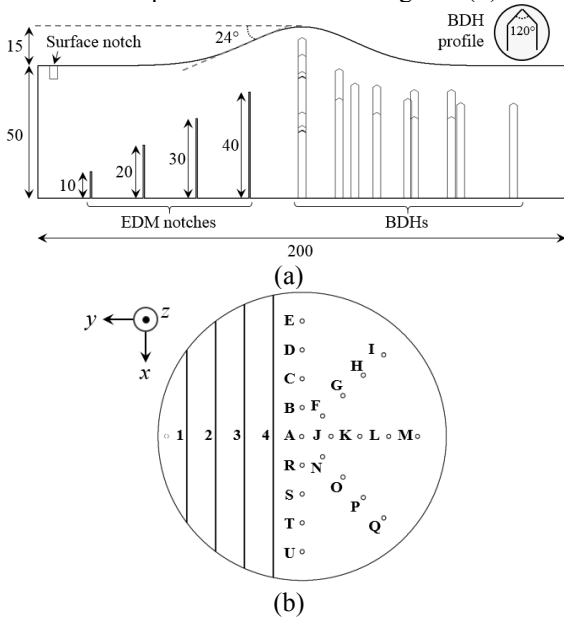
ILLUSTRATION OF THE DESIGNED SPECIMEN WITH MACHINED DEFECTS. (a) IS A SIDE PROFILE AND (b) IS A BASE VIEW.
